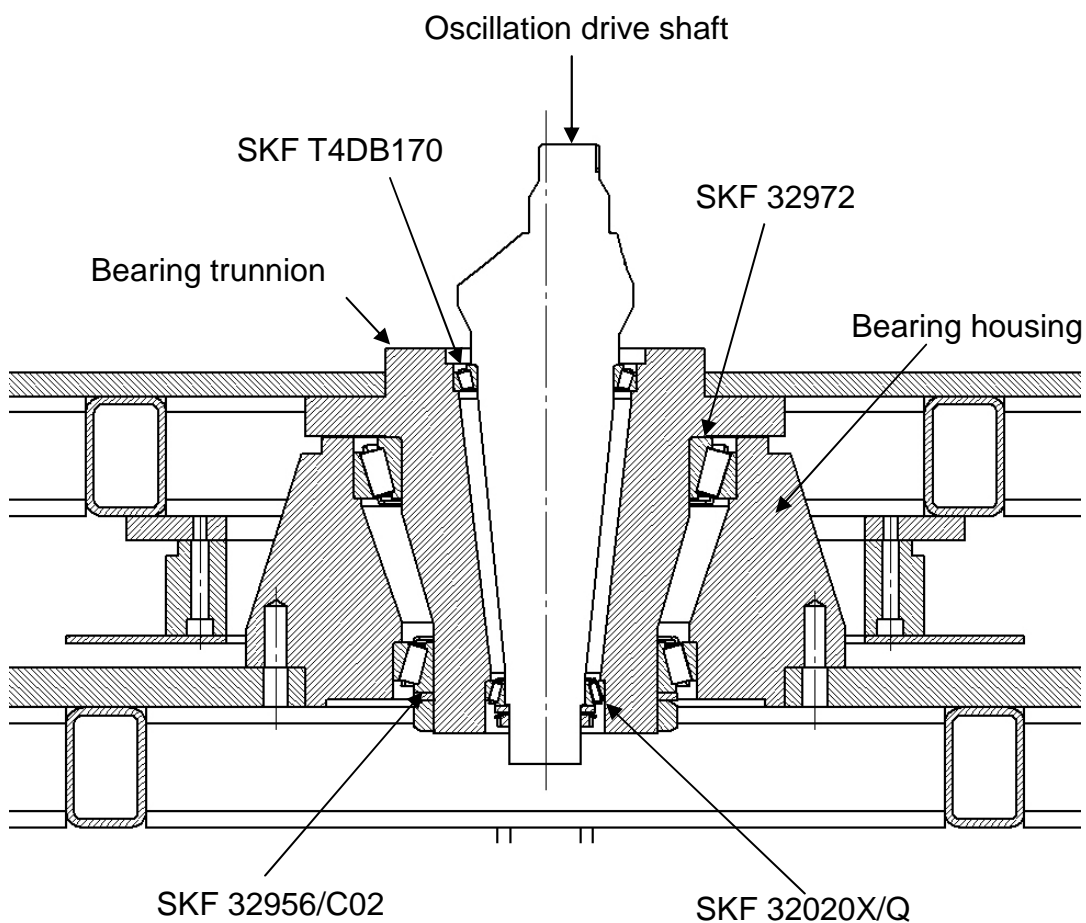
Nested drive shafts in the drive mechanism of Giant Blade
